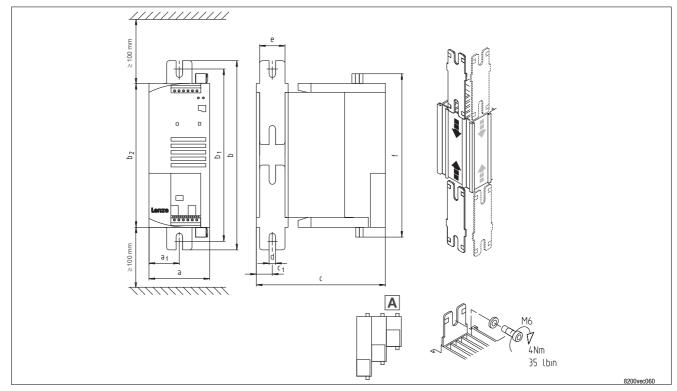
Standard mounting with fixing rails 3 ... 11 kW
